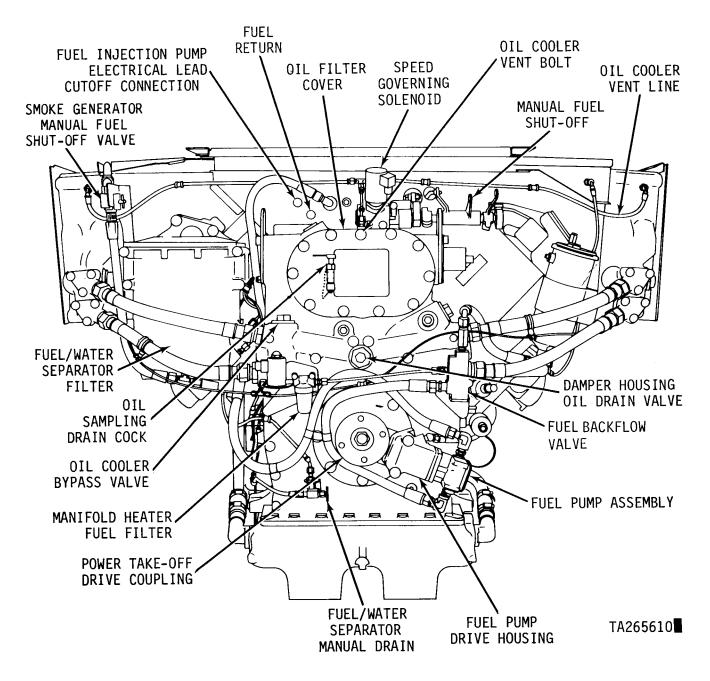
AVDS-1790-2DR engine assembly – front view.
